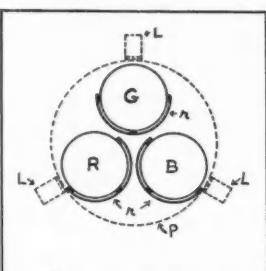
Front view of assembly. Three thin metal lugs *L*, *L*, *L* hold the assembly over the front end of the projecting lens *P*. Instead of these lugs, a tapped, or drilled, block to receive a support rod may be added at the bottom edge.
